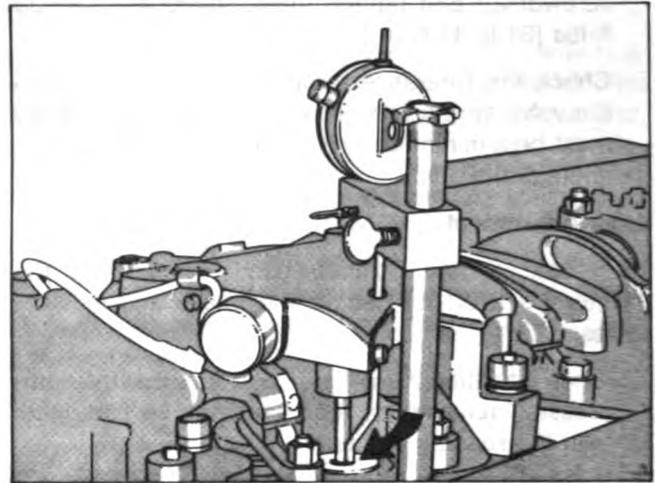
, (OM1061L). Dial indicator in place—extension in contact with plunger
